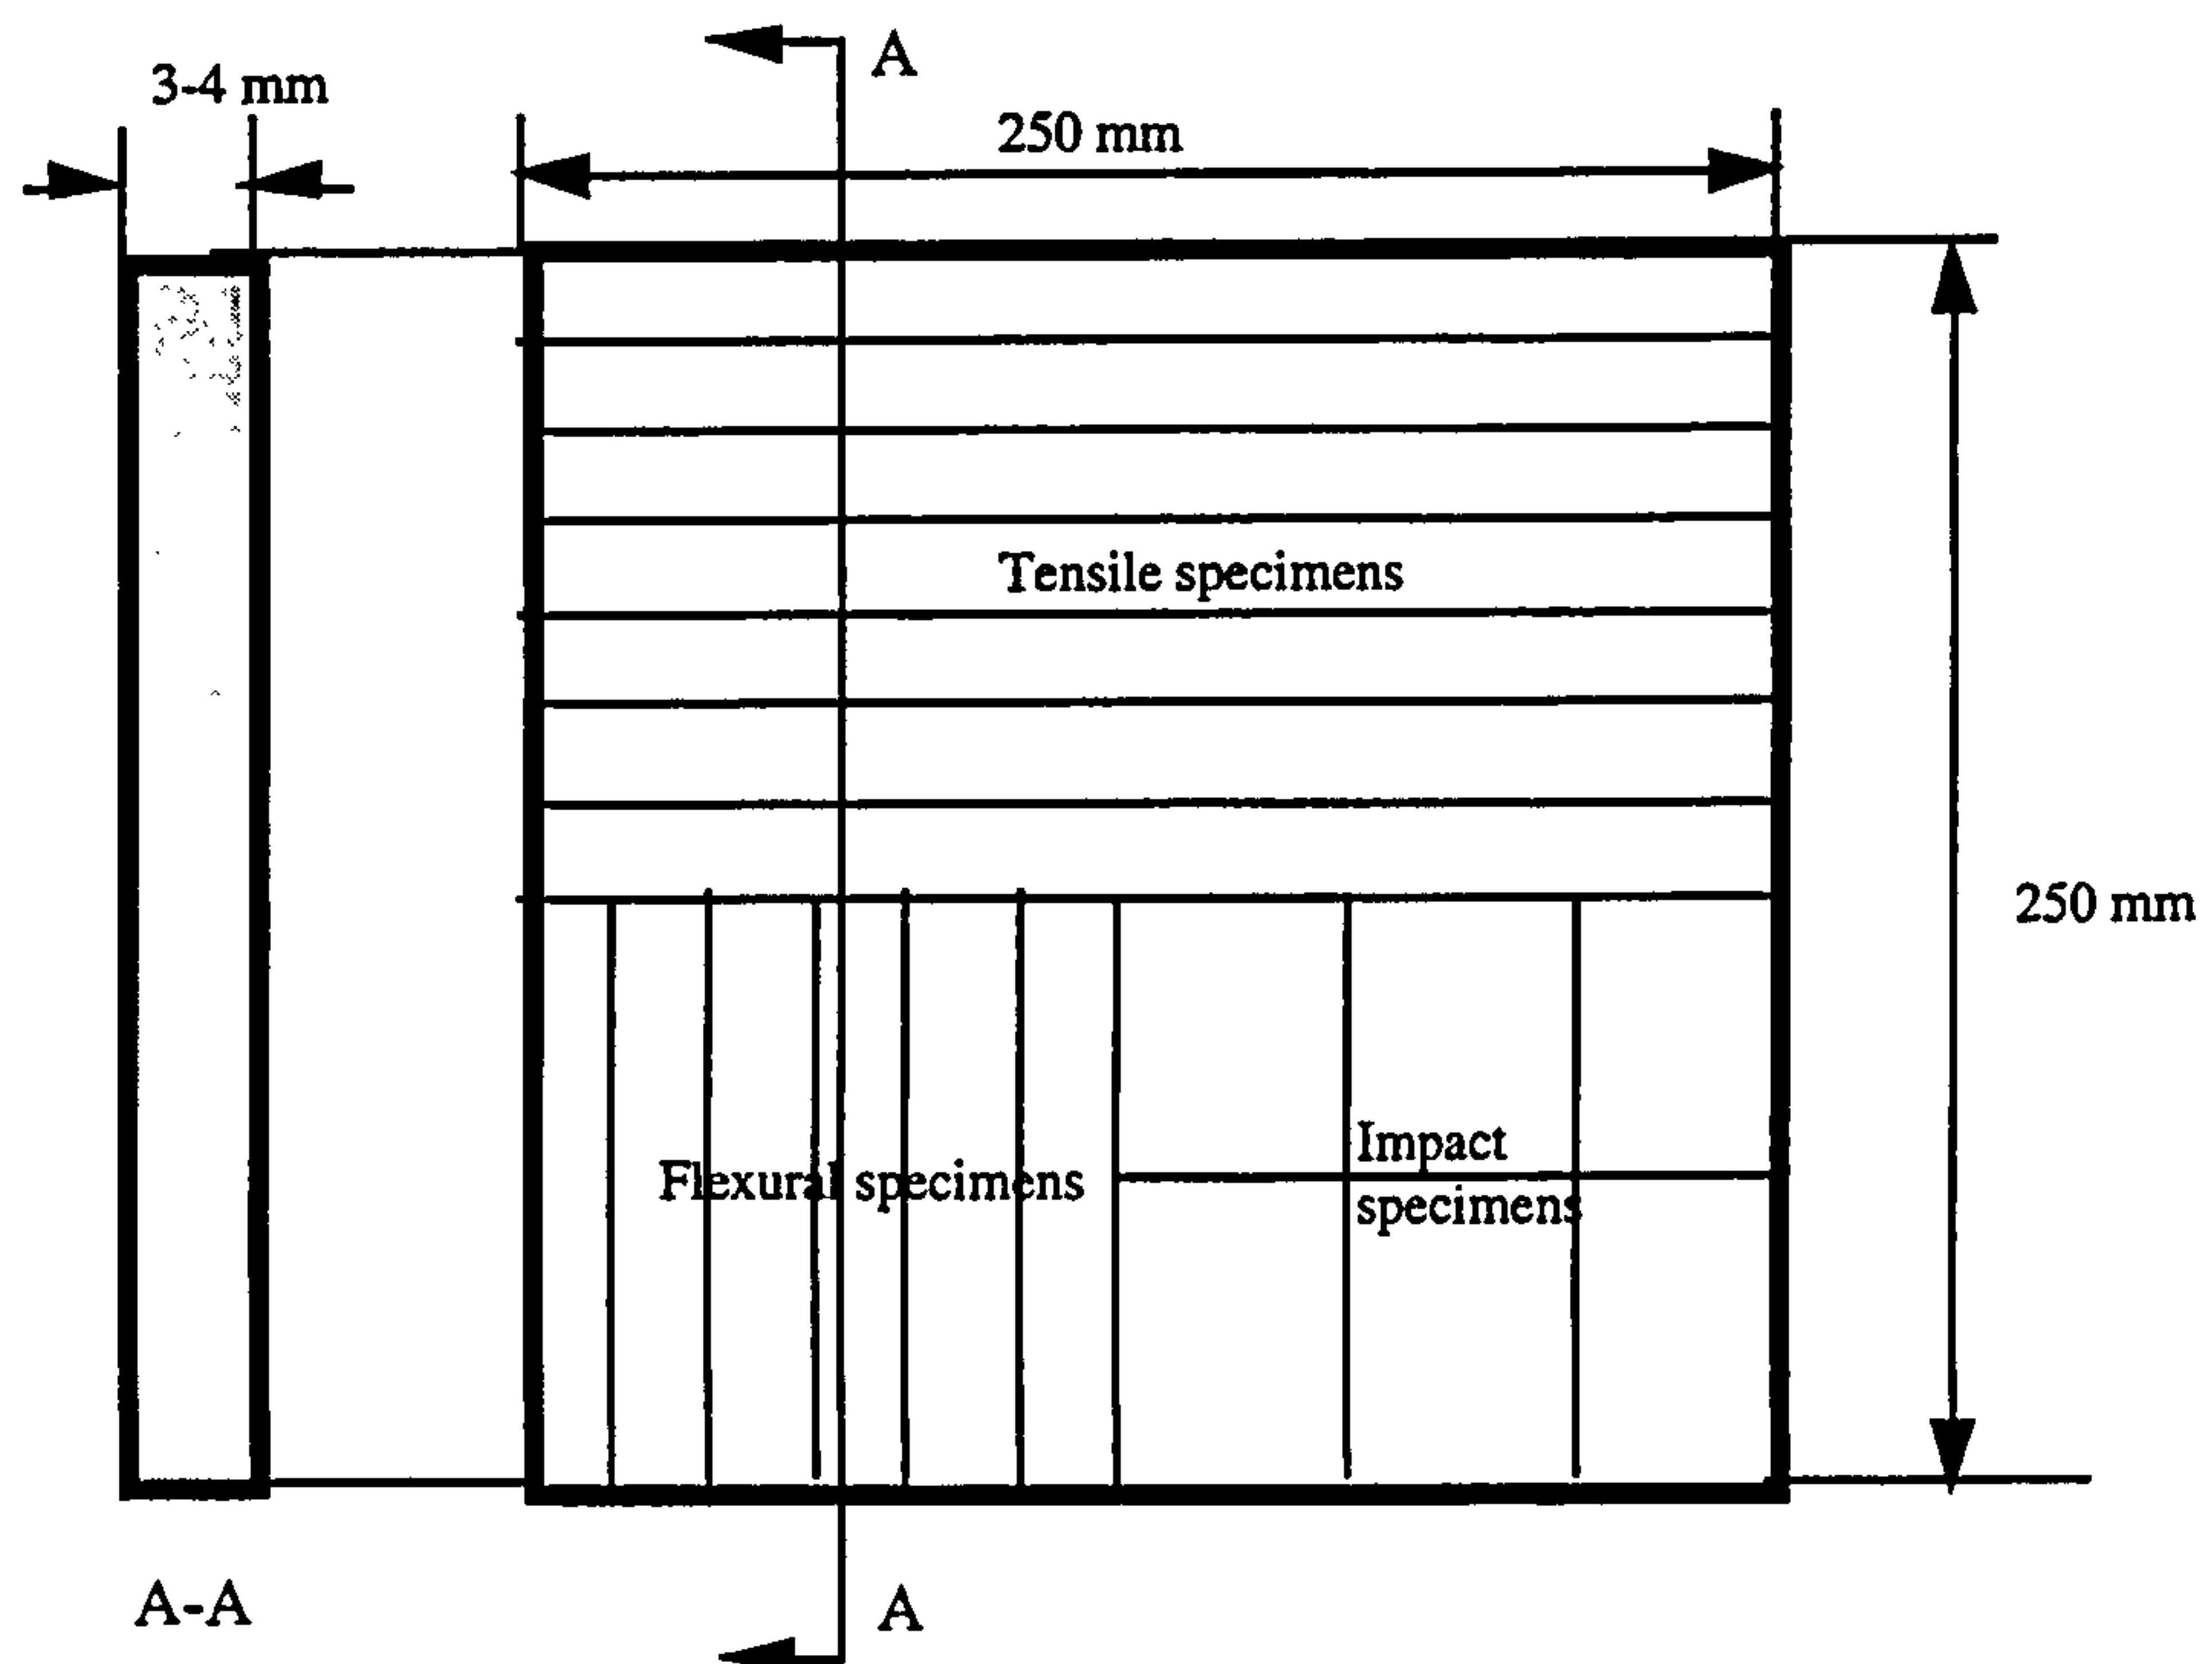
The specimens were cut from the moulded panels for different mechanical, and physical tests and measurements.
